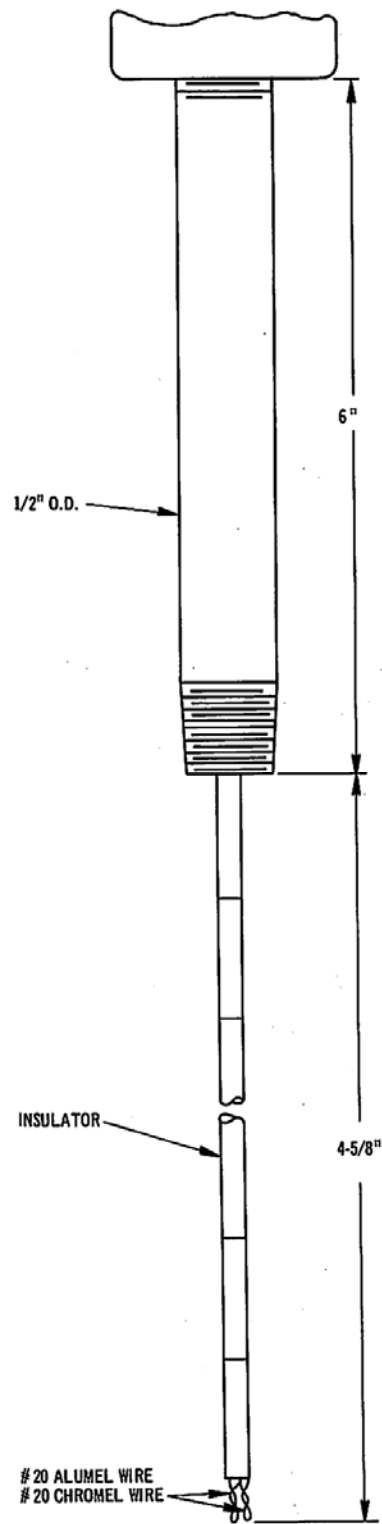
Figure 6.9-4 Thermocouple Assembly for Thermowell [Vol. II, Chapter 6, p.6.9-7]
